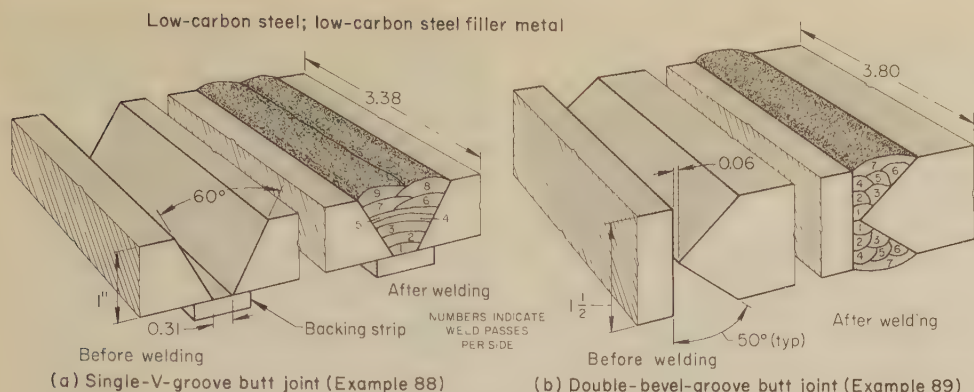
Joint designs and buildup sequences for butt welding of plates 1 and 1½ in. thick (Examples 88 and 89)
